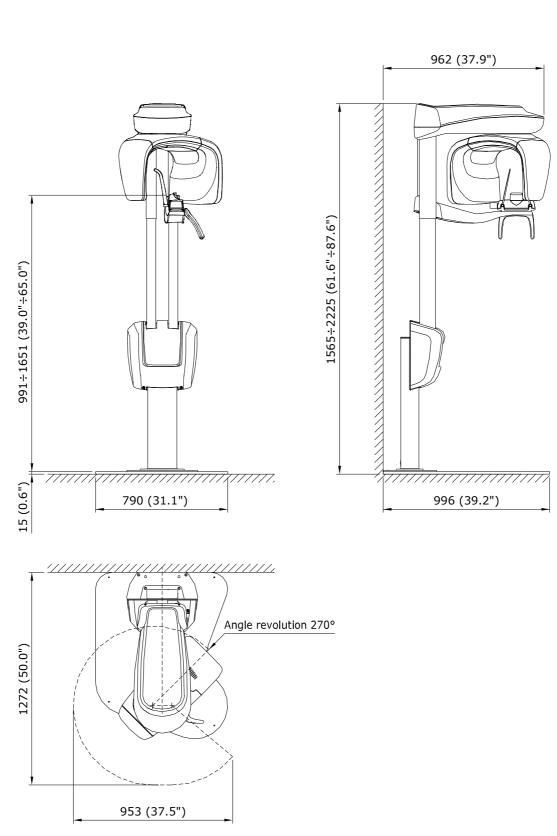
X-MIND prime dimensions - Wall mounted with floor support version
